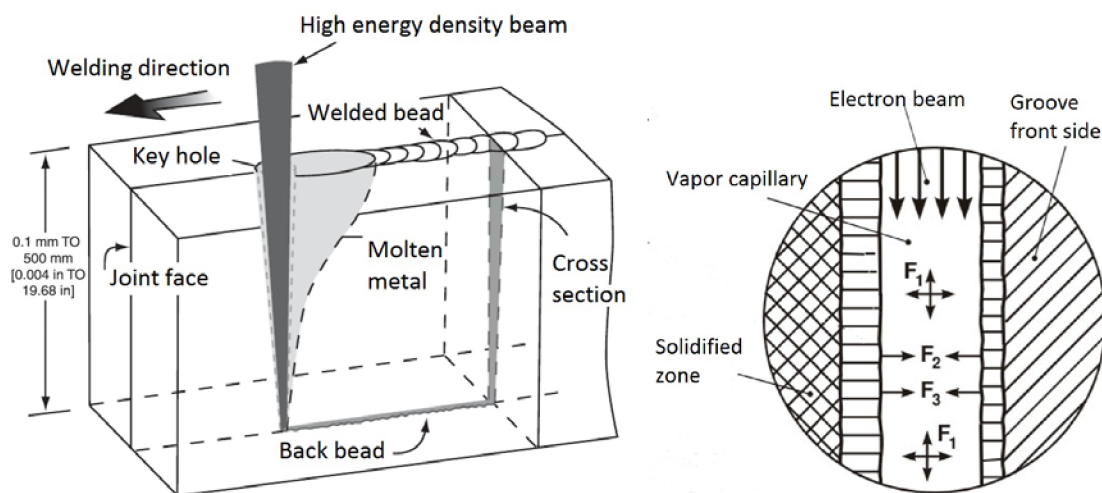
Left - Schematic representation of the welding process [32]. Right - forces acting inside the keyhole [32].
